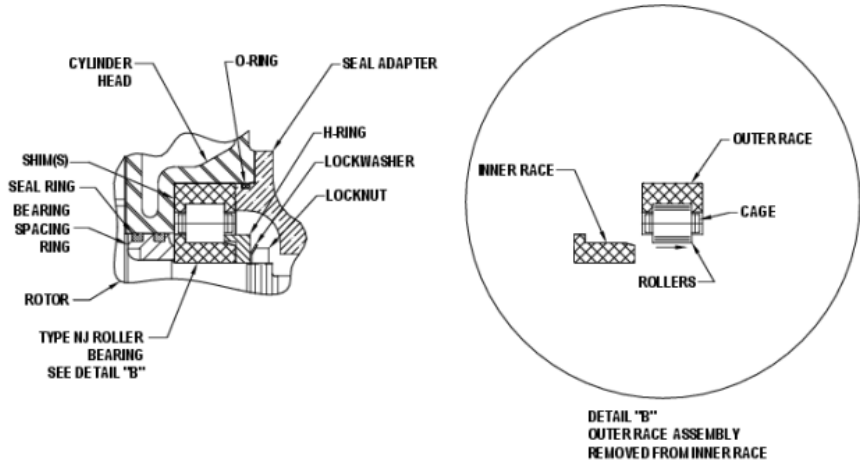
H-Ring, lock washer, locknut, and roller bearing detail.
